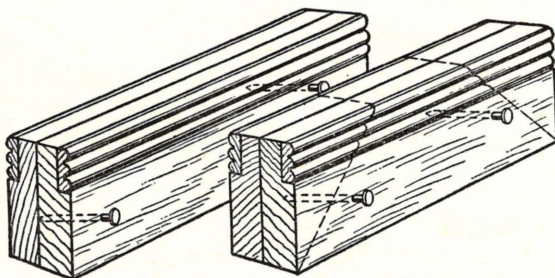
Pieces of the same length may be tacked together for cutting the miter joint
